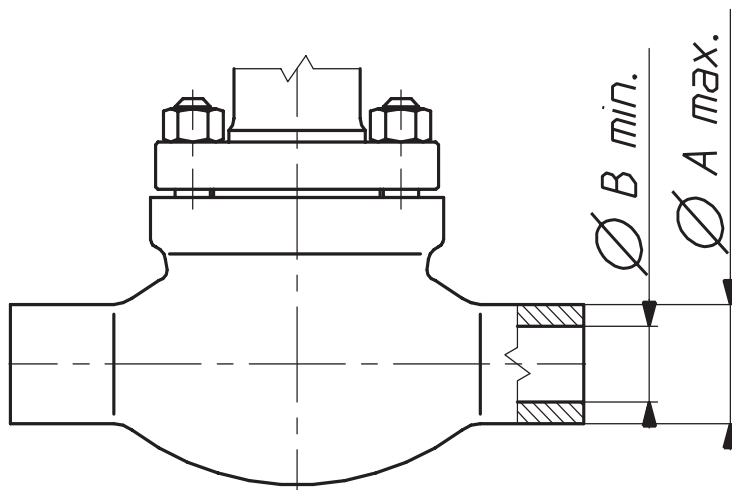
Dimension of butt welding ends executed as cast
